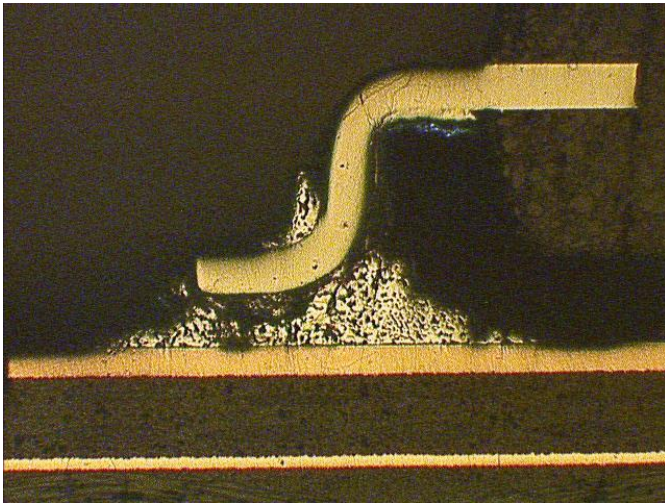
TSOP-50 Solder Joints, Board 8, Component U40, SnPb/SnPb, Failed @ 1252 Cycles
